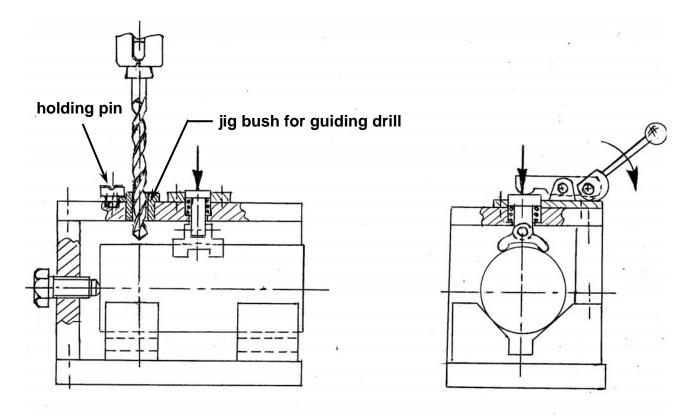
(e) Jig bushing for tool(drill) guidance
